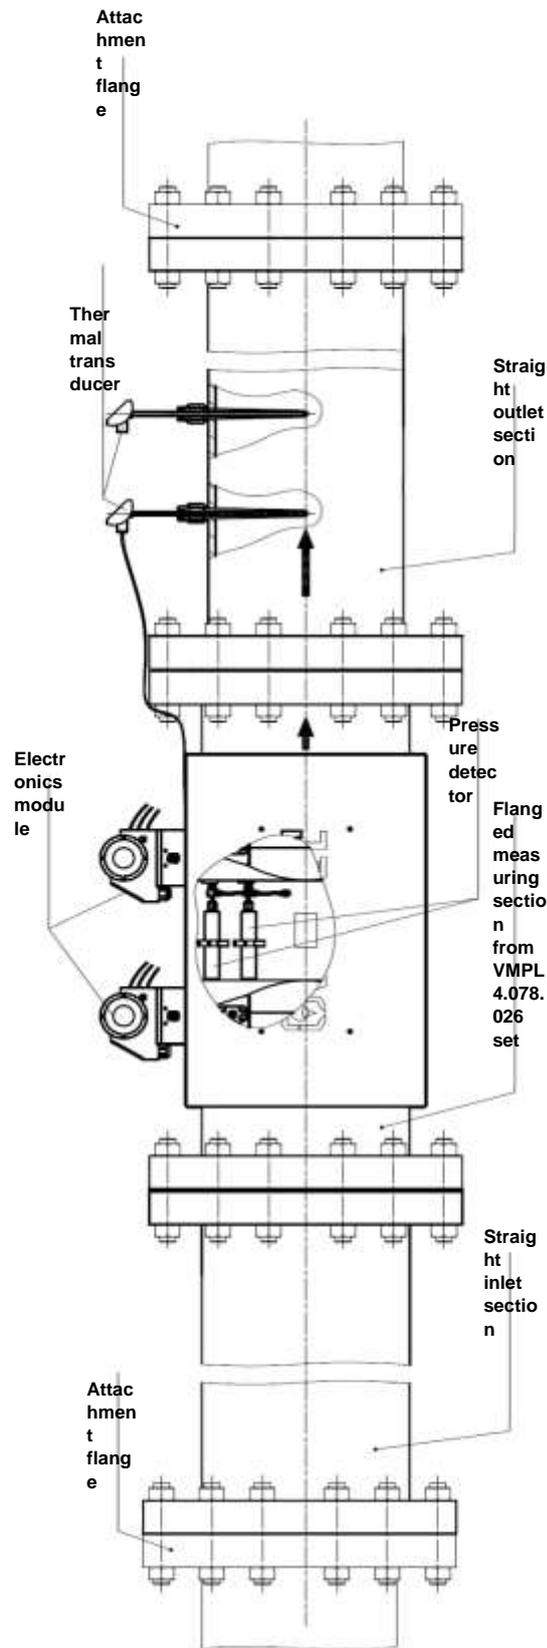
Ultrasonic measurement system Vympel-500 with two electronics units
